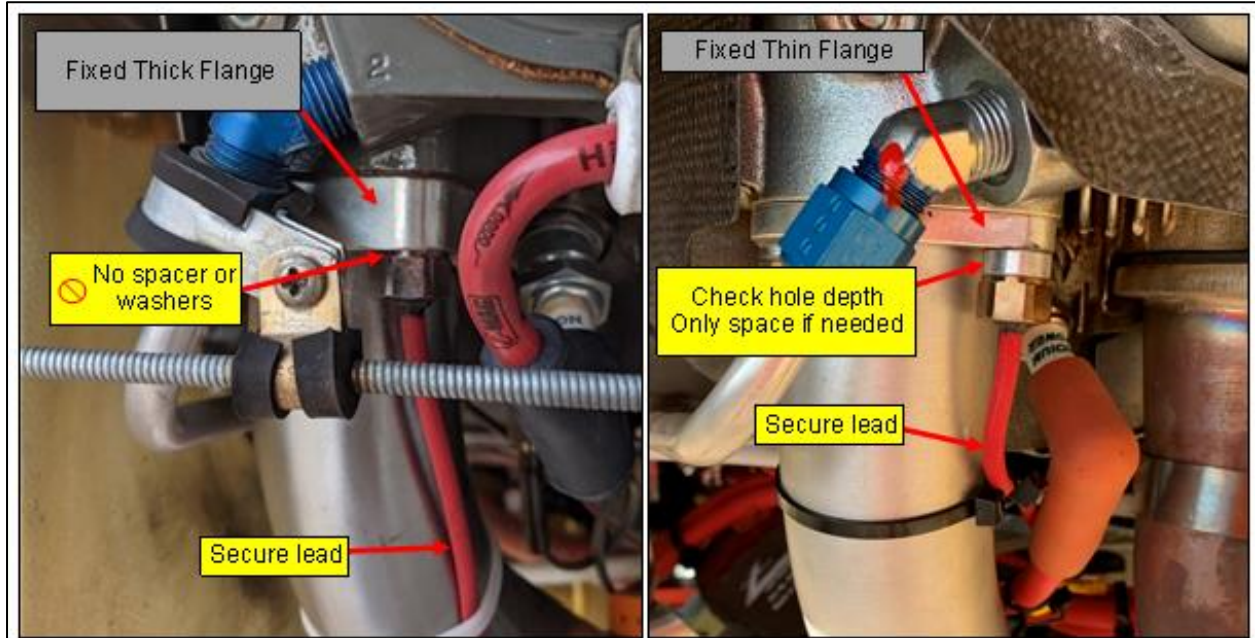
Lycoming style/type cylinder head w/ fixed flange intake. Note: For floating type flange refer to Figure 7.7.
